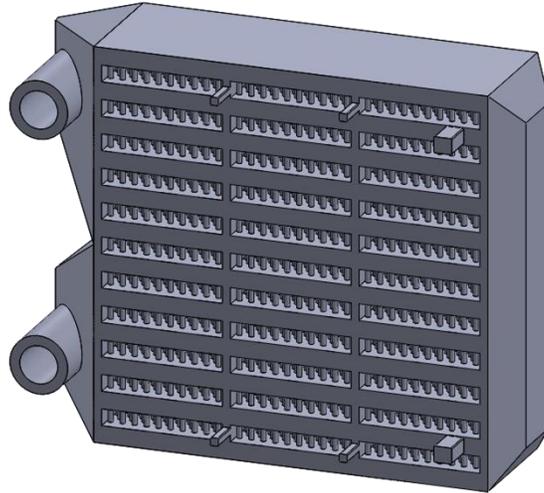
Prototype heat exchanger printed using material extrusion with ABS.
